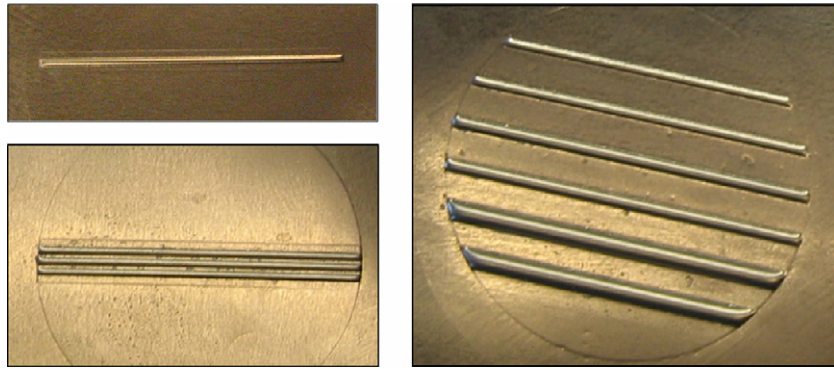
Samples of hydroformed micro-channels using SS304, 0.051 mm thick.
